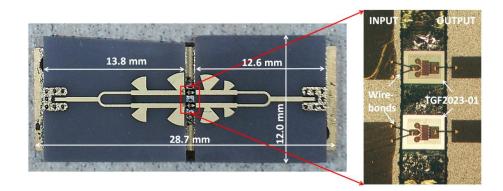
Photograph of the fabricated and assembled PA with inset showing gold wirebonds
